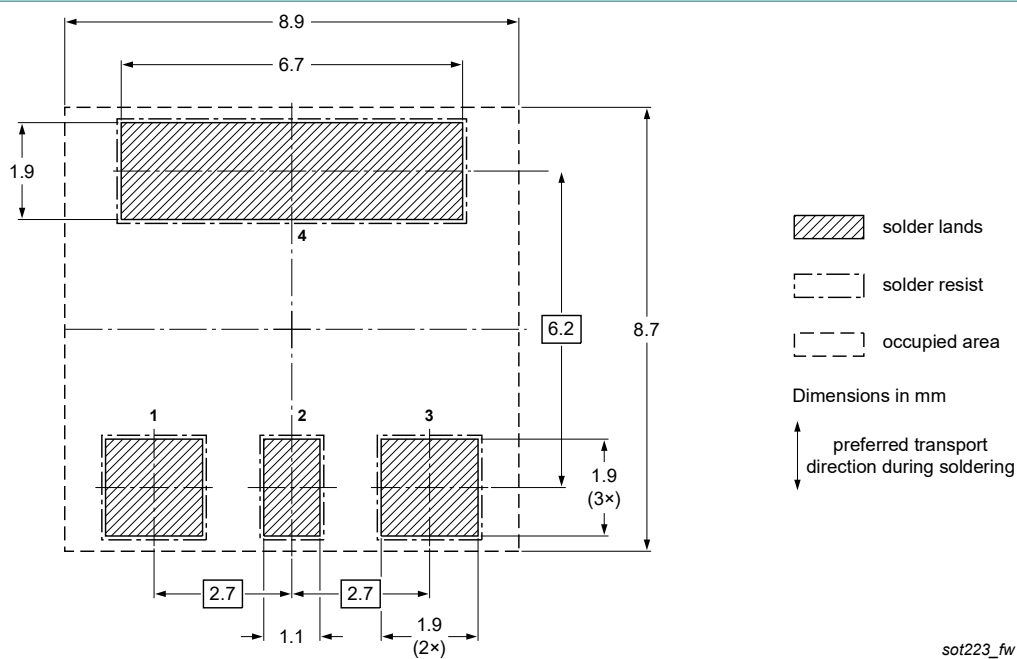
Wave soldering footprint for SC-73 (SOT223)
